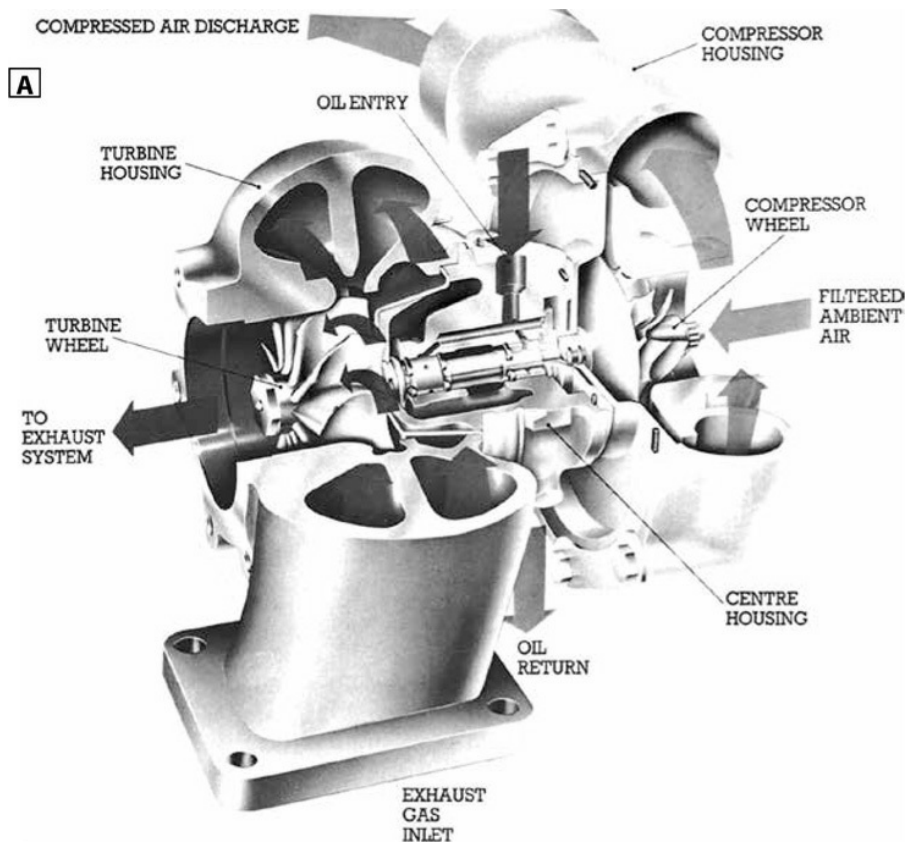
A. A cutaway view of a turbocharger. (Garrett Automotive
